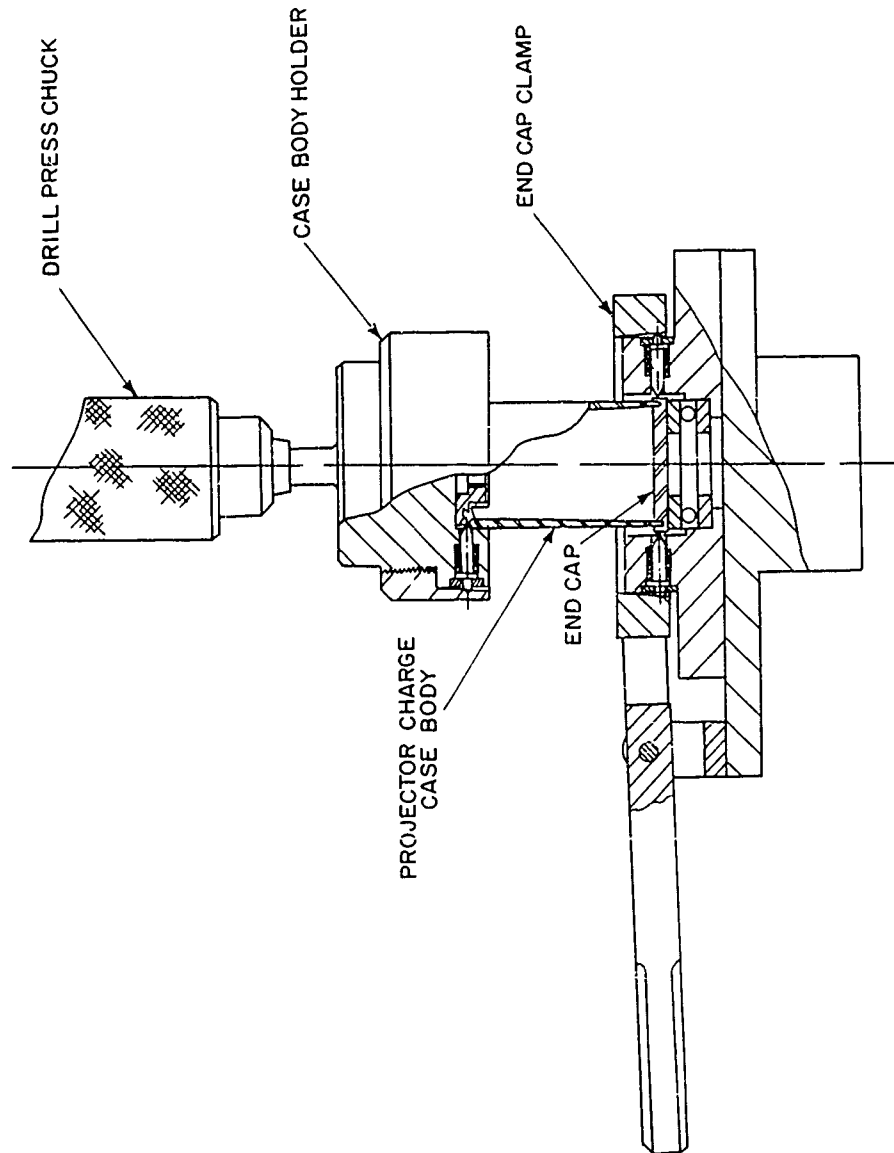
SPIN WELDING FIXTURE FOR PLASTICS PROJECTOR CHARGE CASE
